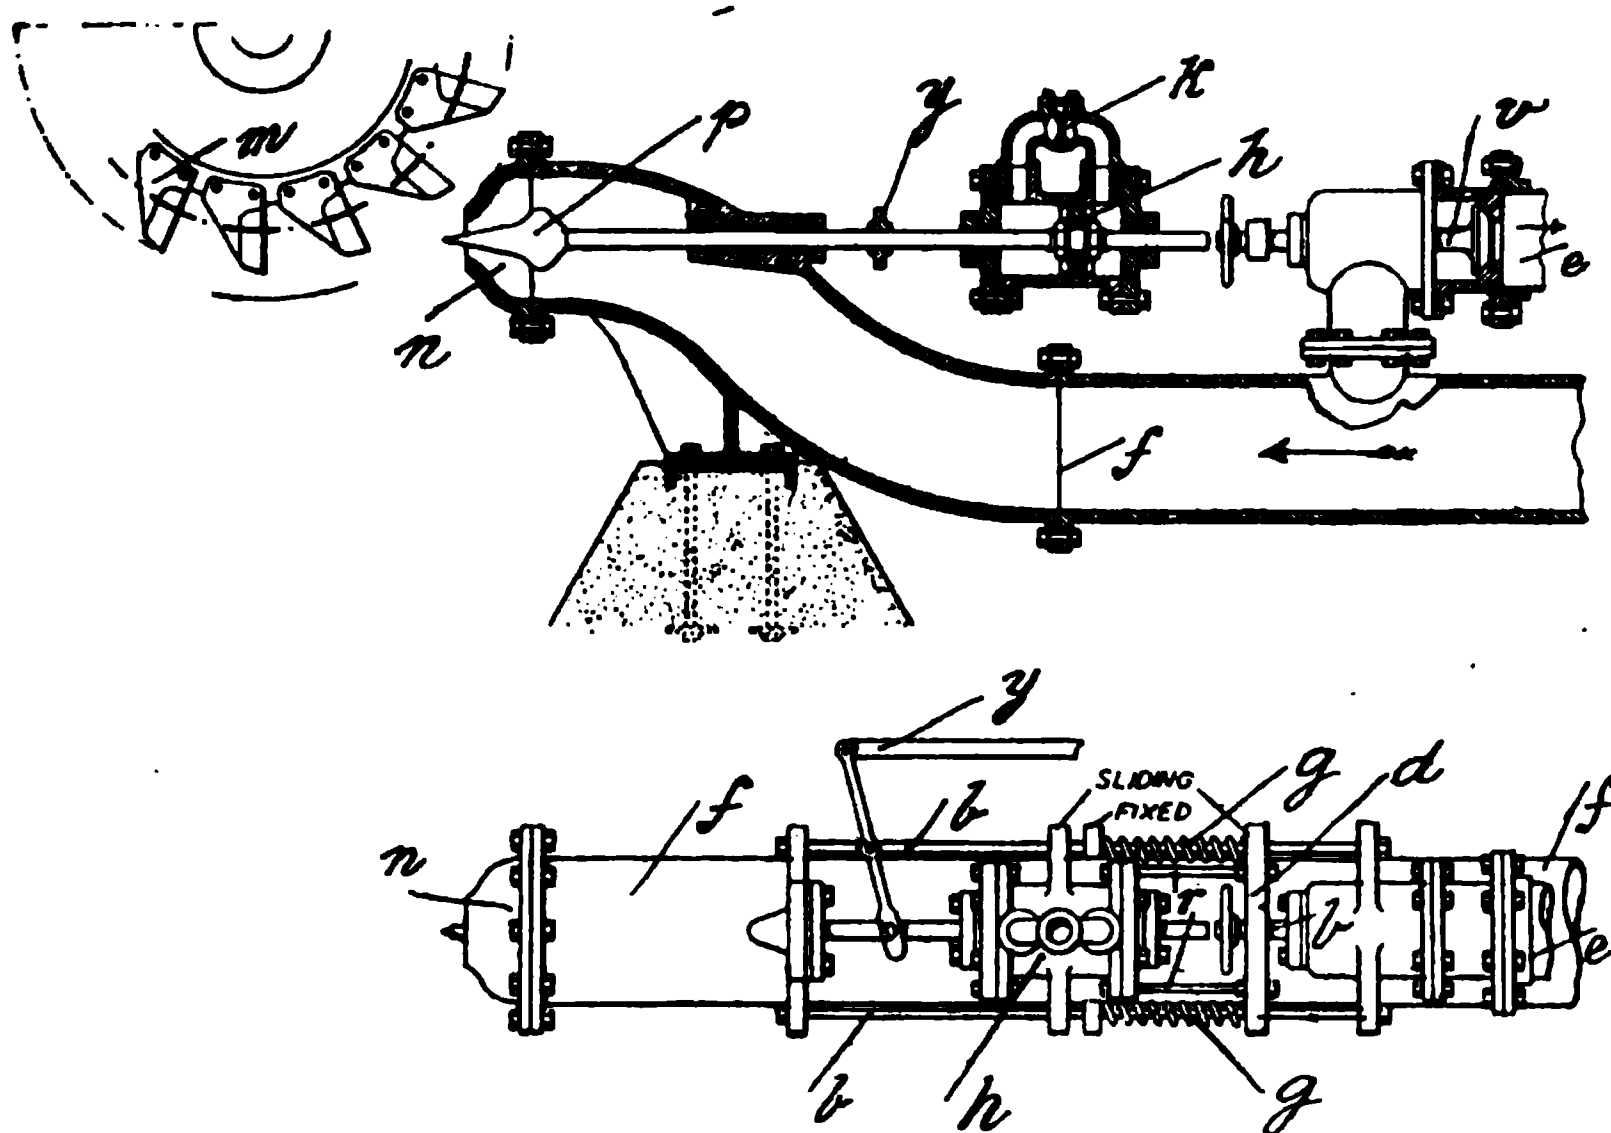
Arrangement of Compensating Pressure Control for Impulse Turbine.
